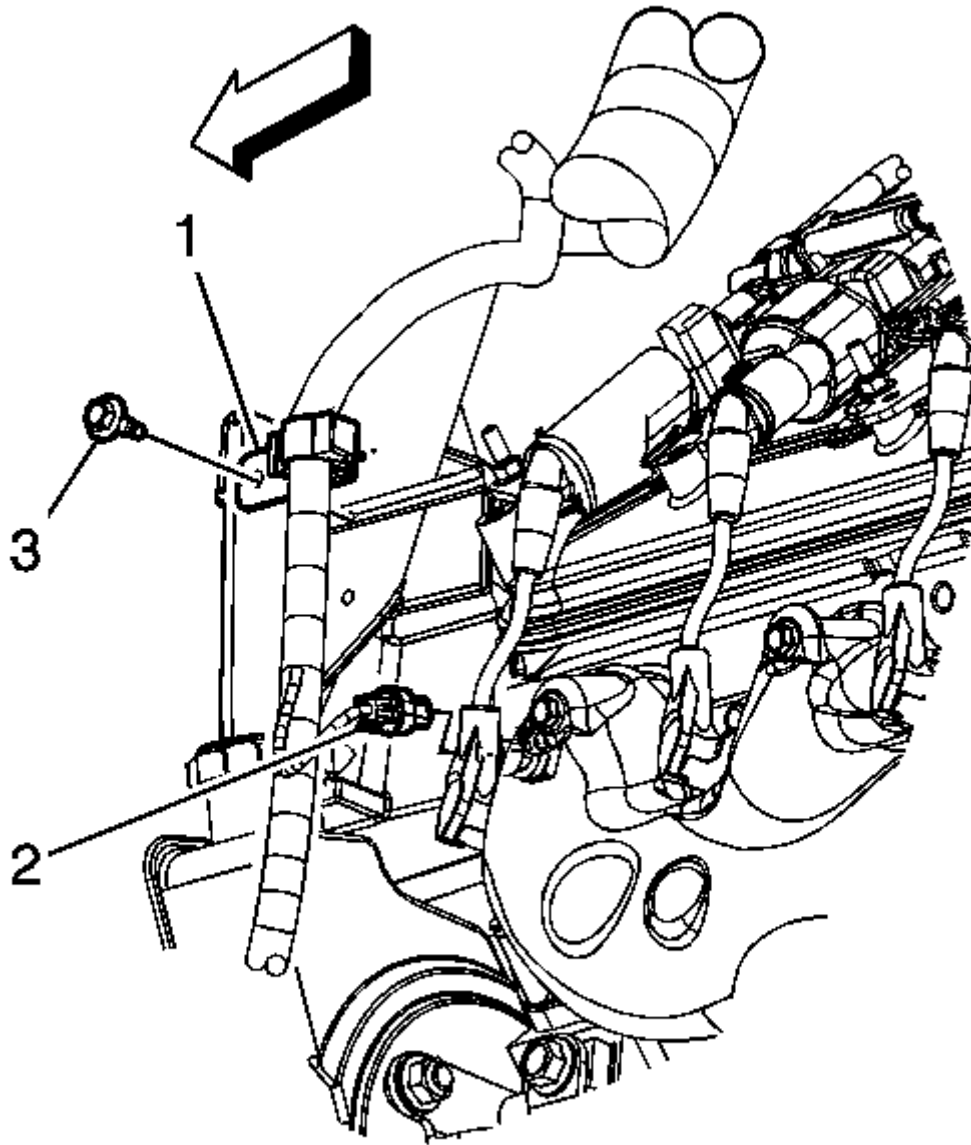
View Of Engine Wiring Harness, Clip, Bolt & Connector
